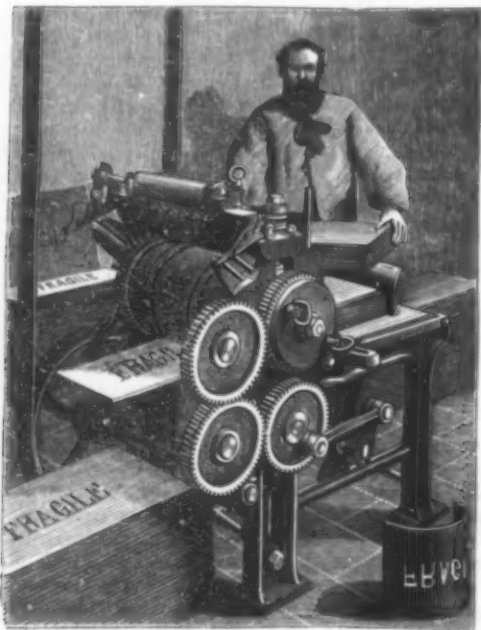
MACHINE FOR PRINTING ON WOOD.
